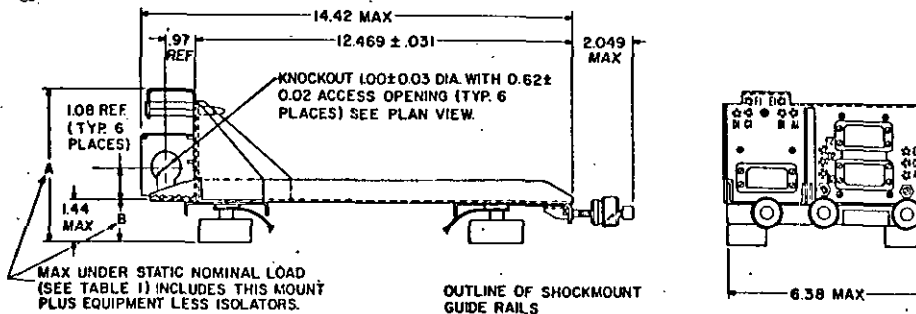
Mounting MT-3597/ARC-101, Outline Dimensions
